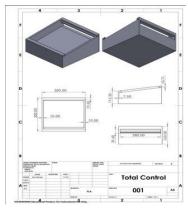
SOLIDWORKS drawing showing the design of the first prototype of total control and its dimensions from a top-down, left-side, and right-side view. Prototype designed with PLA material.
